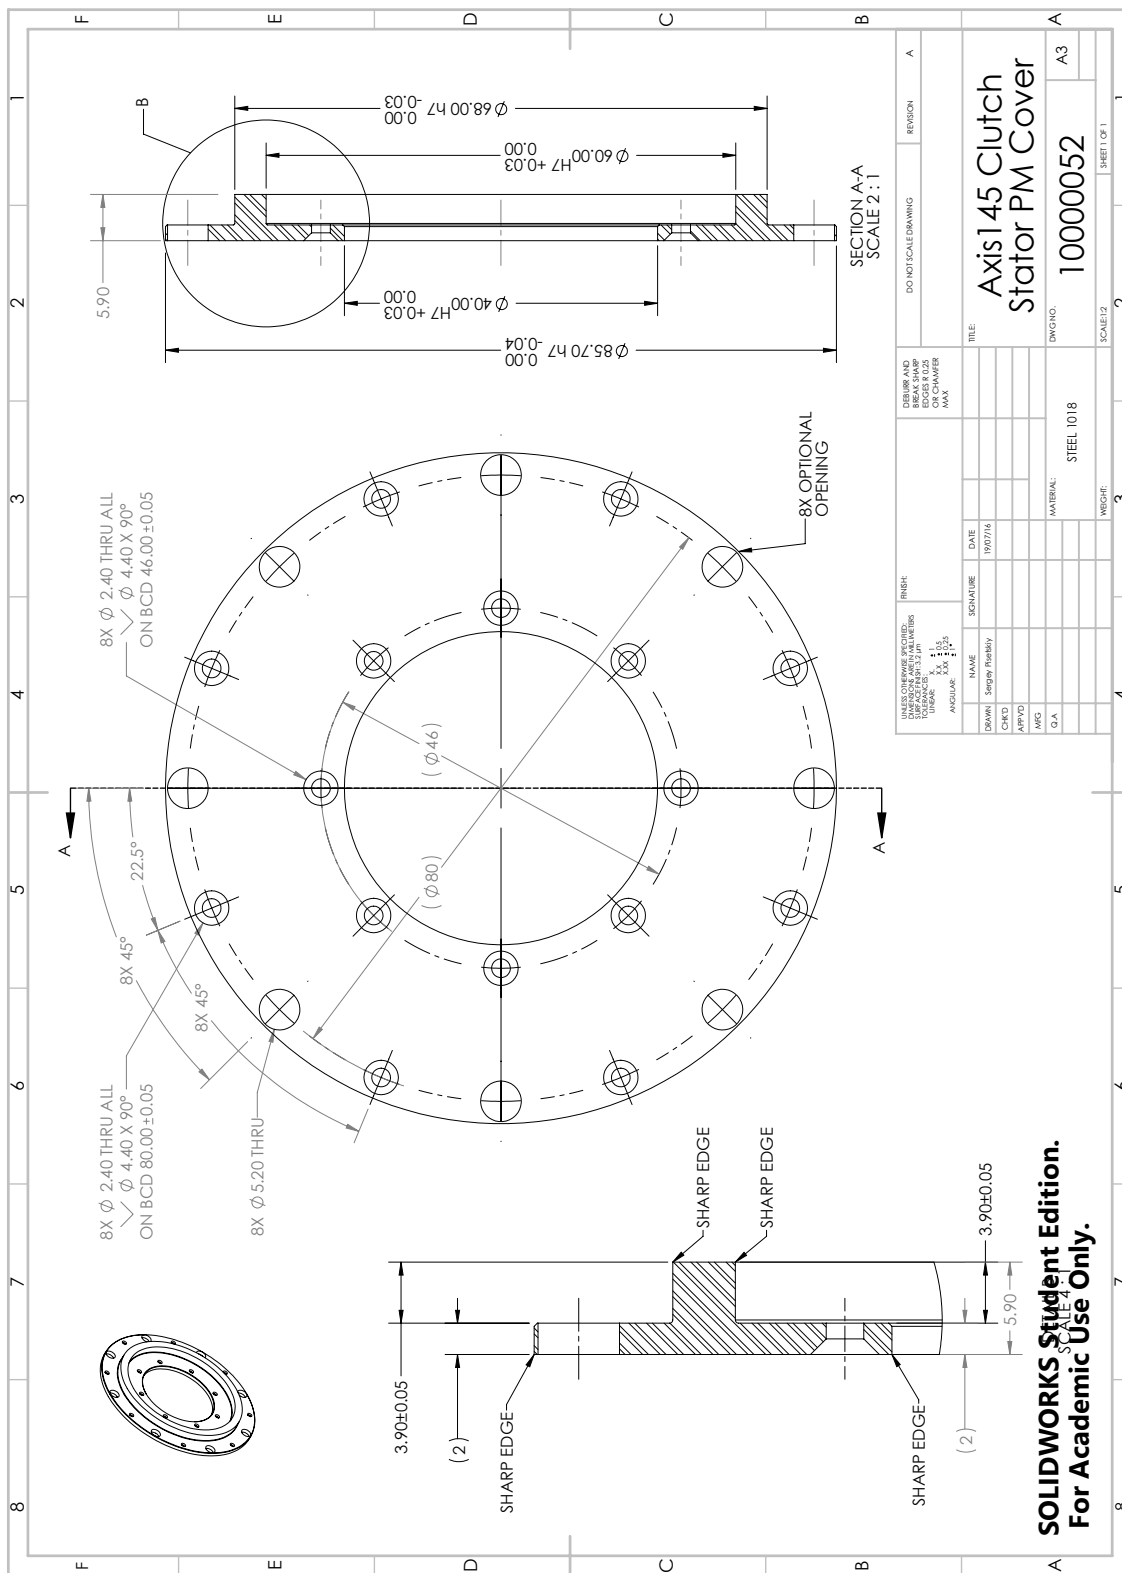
Drawing: Joint 1, 4, 5 clutch stator permanent magnet cover.
